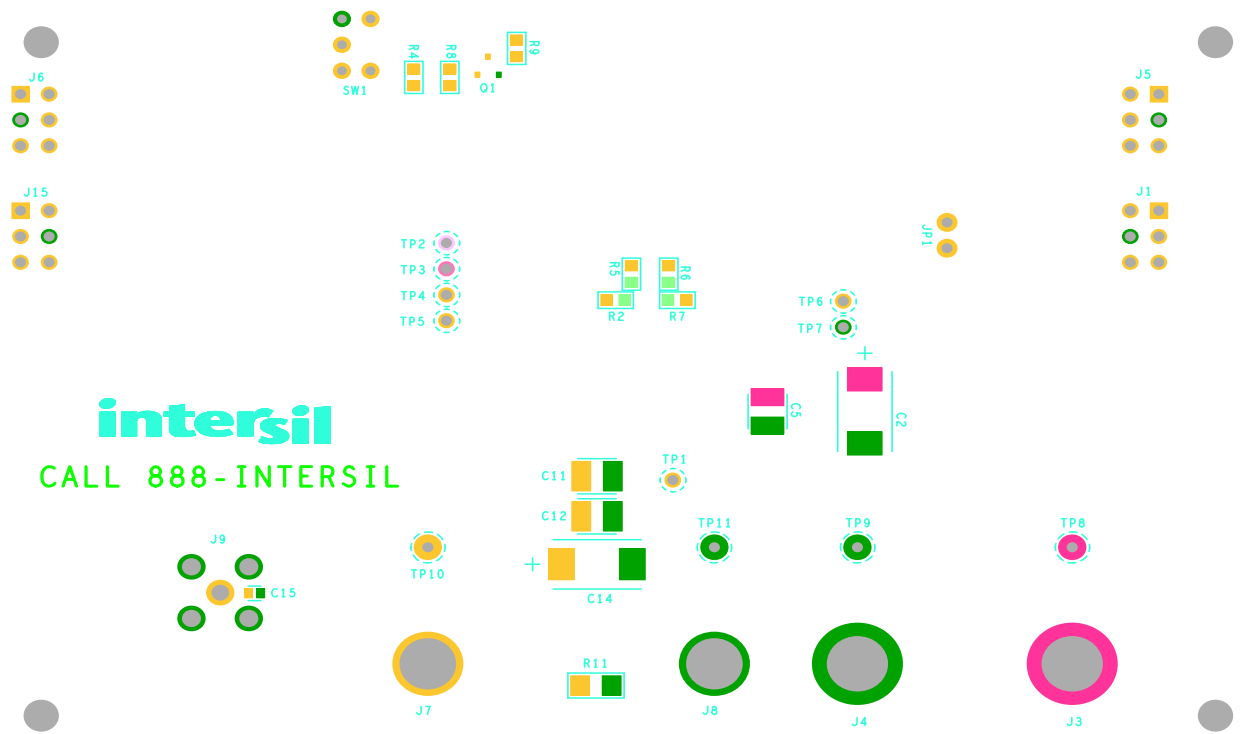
PCB - BOTTOM LAYER (BOTTOM VIEW)
